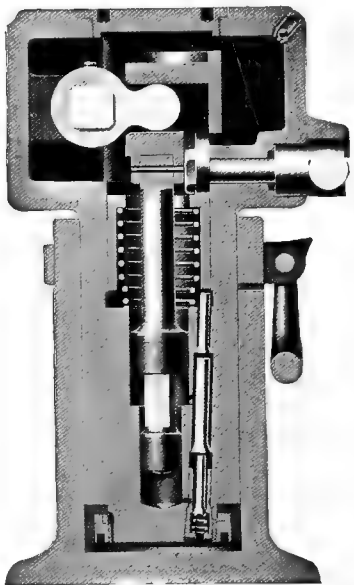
Hydraulic Plain Type Car Inspector's Double Pump Jack. Richard Dudgeon.
